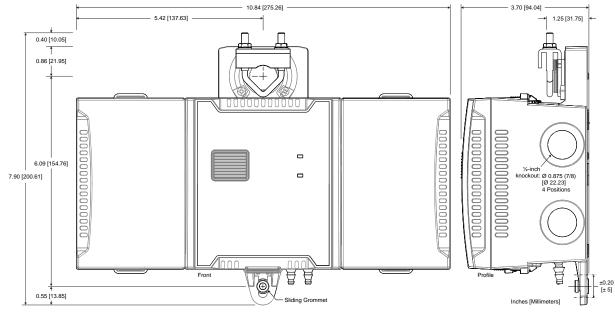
ECB-VAV Controller with Terminal Covers Dimensions
